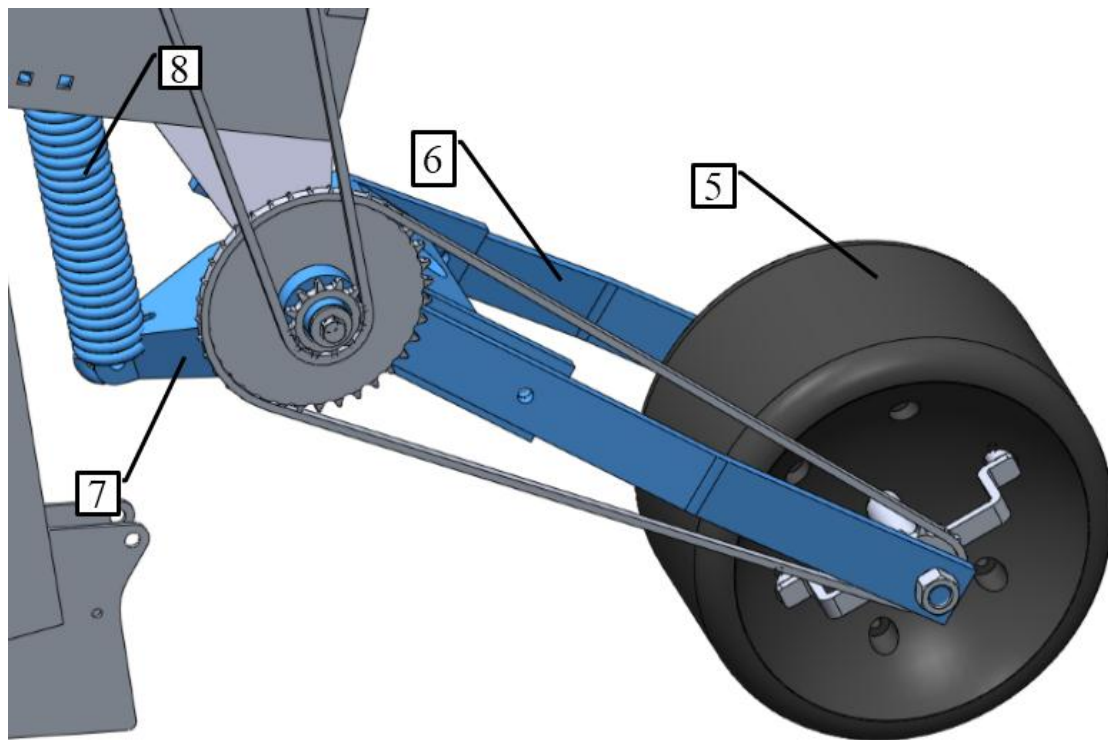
8-Packing assembly parts, 5) Press wheel, 6) Press wheel links, 7) Spring connection, 8) Extension spring
